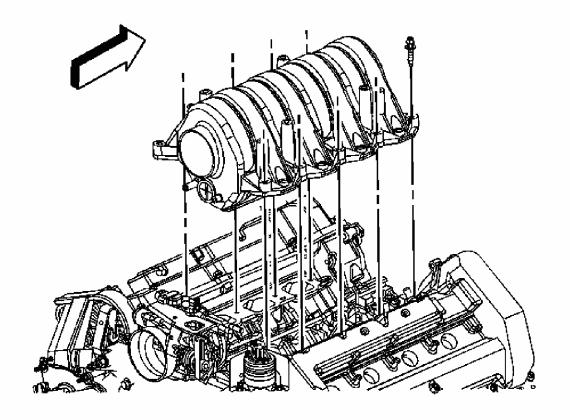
Intake Manifold Courtesy of GENERAL MOTORS CORP.
